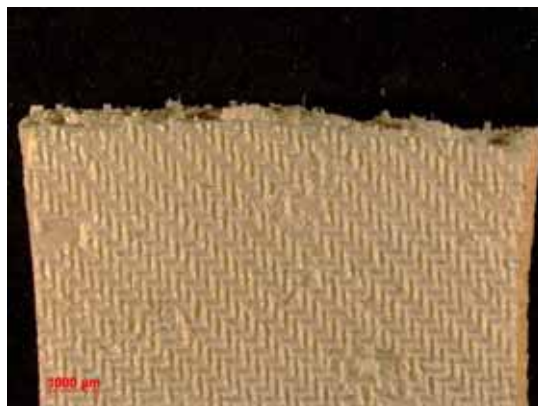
Fracture surface of the N610/Al₂O₃ specimen with 8ply HSW subjected to tension to failure in laboratory air at 1100 °C.
